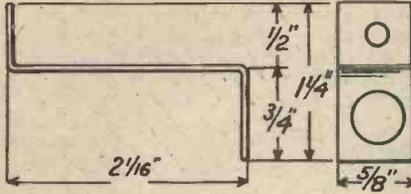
The three brackets may be made of strip brass from the details shown.
